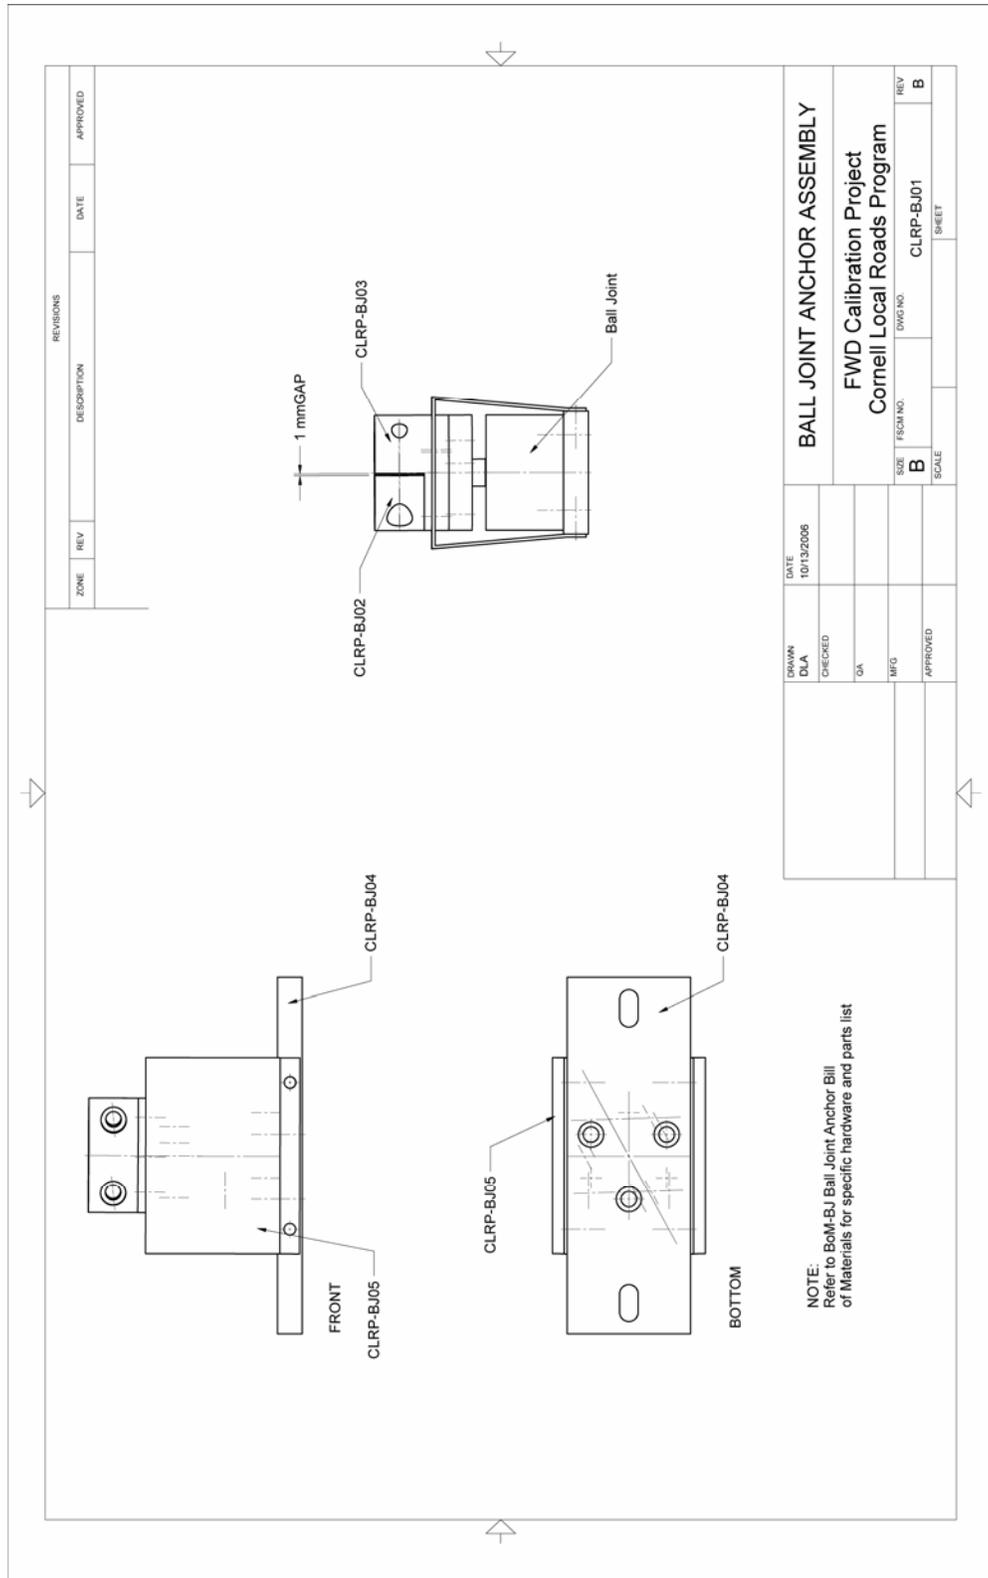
Drawing. CLRP-BJ01 Ball Joint Anchor Assembly.
